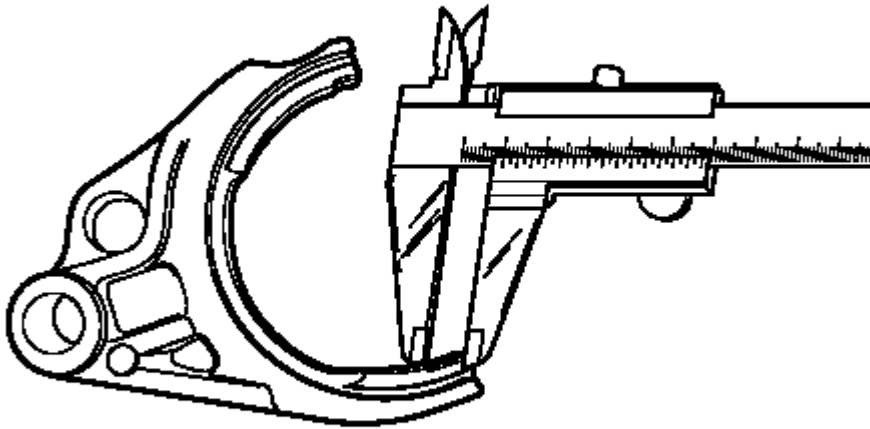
Shift Fork Cleaning and Inspection (HD)
